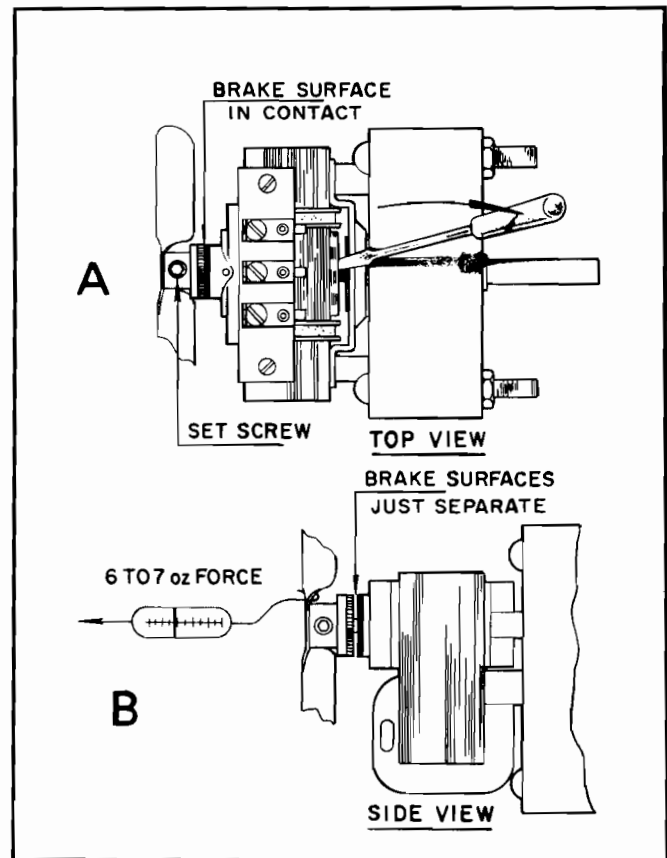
Rewind and Take-up Motor Brake Tension Adjustment
